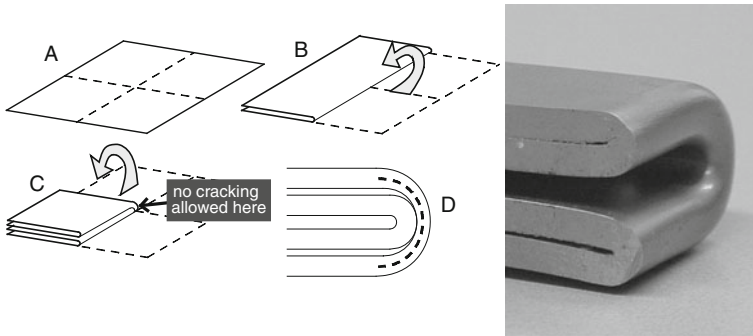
The handkerchief-bending-test. A piece of sheet is bent twice (A-B-C); no cracking is allowed in the corner of the double bend. *Right* a picture of an actual test carried out on 6 mm thick (!) high-strength steel
